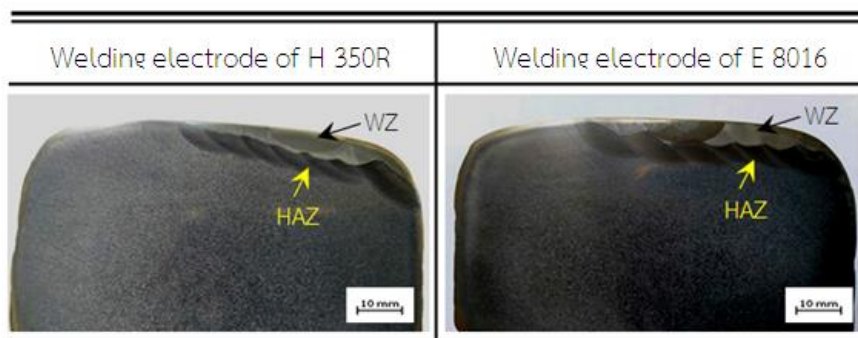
Macrostructure examining in welding zone (WZ) and heat-affected zone (HAZ)
